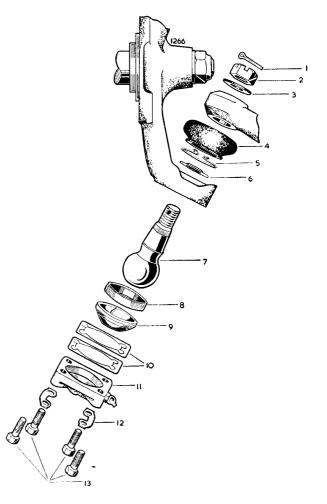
Exploded view of the Lower Wishbone Ball Joint
